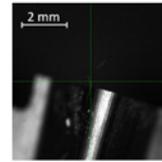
WP2 Gear Shaft B, Spline A 46 Gears produced (Material removed: 1.6974 in³) Tooth 1—Tip (left) Face (right).
